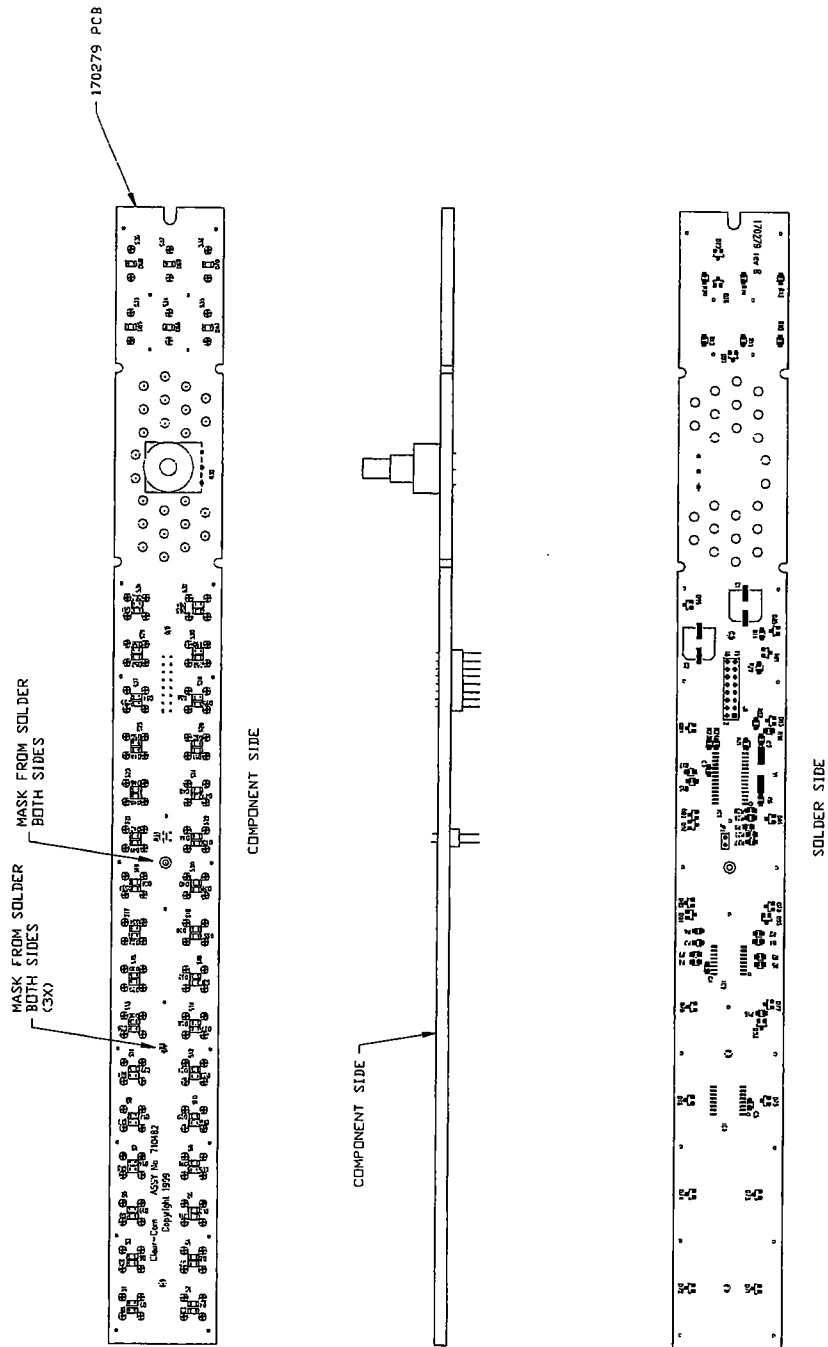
ICS-1016/ICS-1008/EXP-1016 Front Panel PCB Schematic
